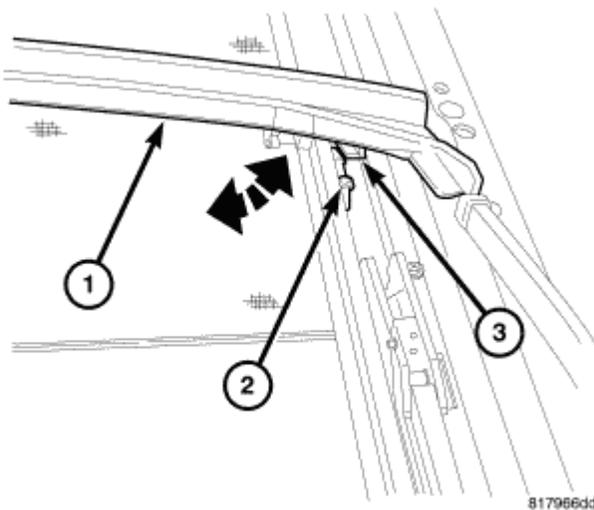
Pushing Down On Center Of Trough To Flatten It Out And Installing Remaining Trough Guide And Guide Shoe Into Track
